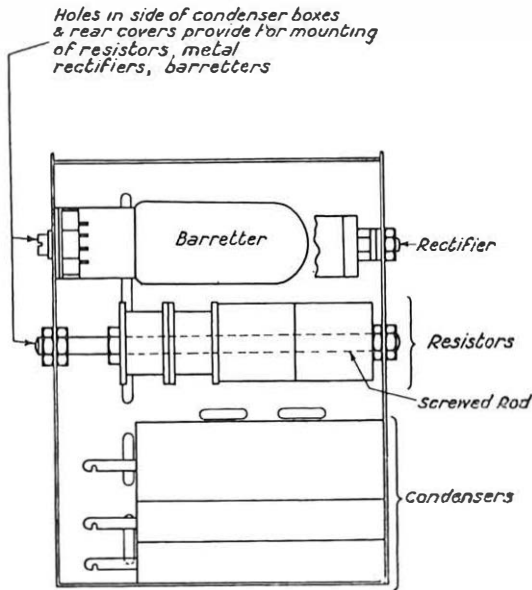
CONDENSER BOX—MIXED EQUIPMENT.
